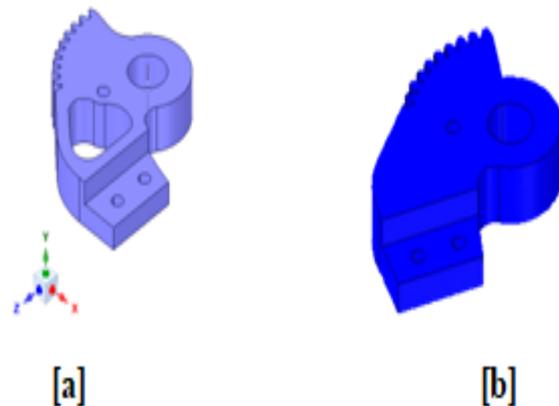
Topology Optimization Result of the External Sector Gear of the Prototype Gripper: (a) Optimized; (b) Original
